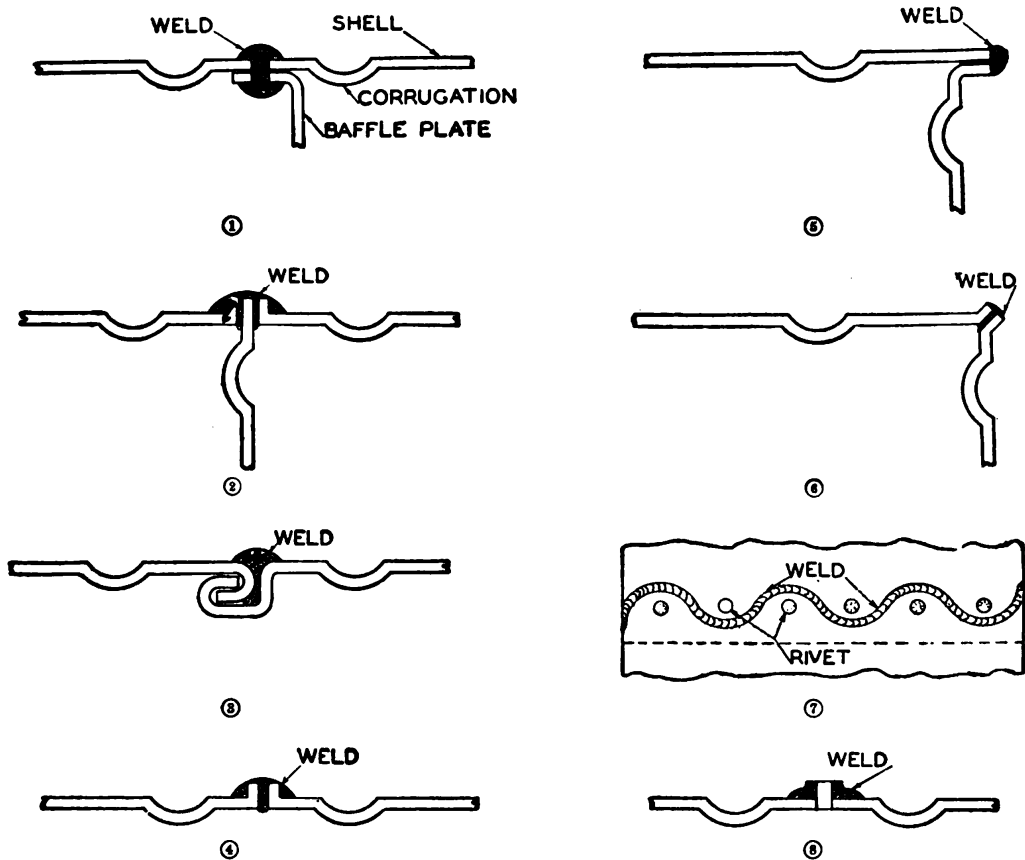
Seams used in construction of fuel and oil tanks.
